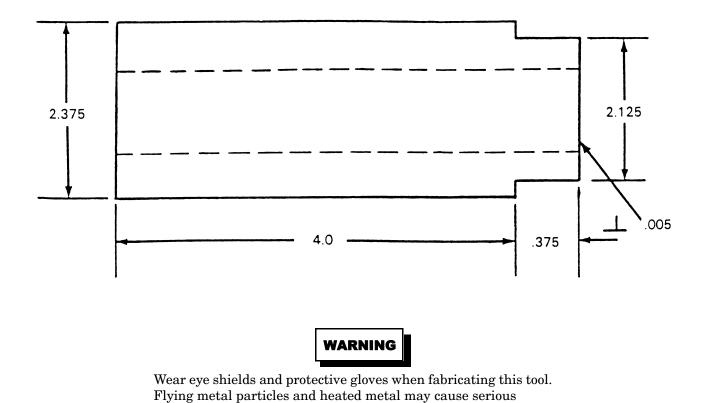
Hydraulic Piston Pump – Valve Block Bearing Race Removal Tool
